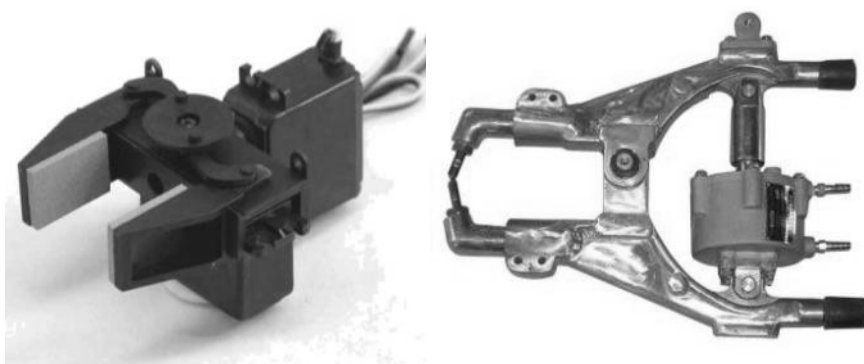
Robotic Gripper and Tool (spot welding)
